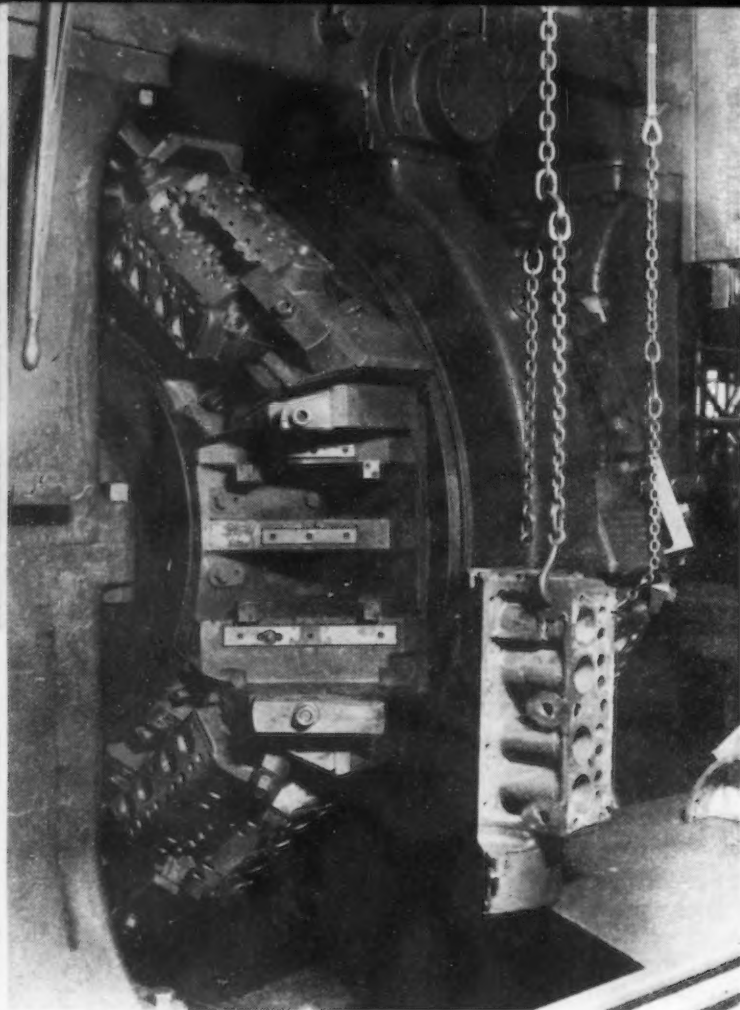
Drum-type millers are still popular at the Rouge plant for machining large flat surfaces. In this unit the face of each bank is being milled in two set-ups. Eight locating lugs, broached in the first operation on the rough block, are first broken off by hand chisel before the block is clamped by wrench in the drum fixture. The counter-weighted handling slings, suspended from a jib crane, are a great help to the operator.
